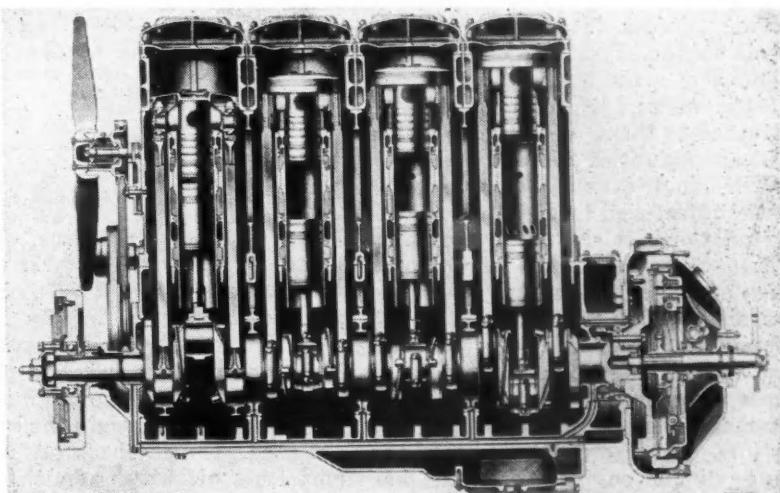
Single-crank Junkers-type engine manufactured by Krupp
